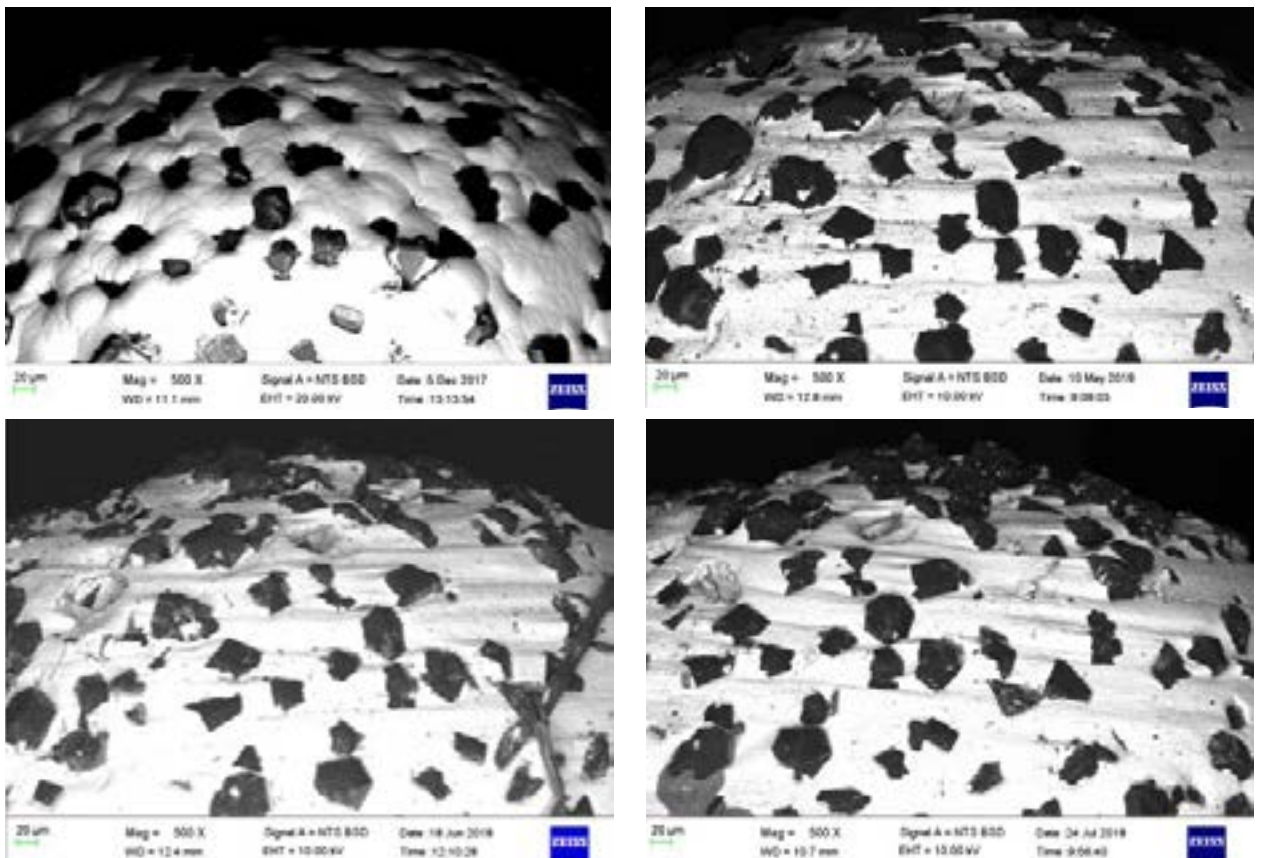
The Diamond bur, size 1.2 mm magnification X500 before milling (top left), after milling the 10th crown (top right), after milling the 20th crown (bottom left), and after milling the 30th crown (bottom right).
